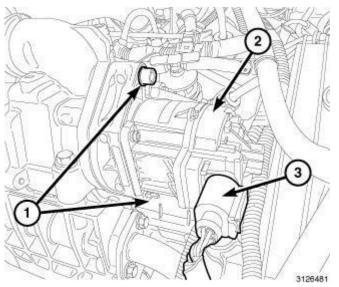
EGR Valve, Bolts & Connector Courtesy of CHRYSLER GROUP, LLC
